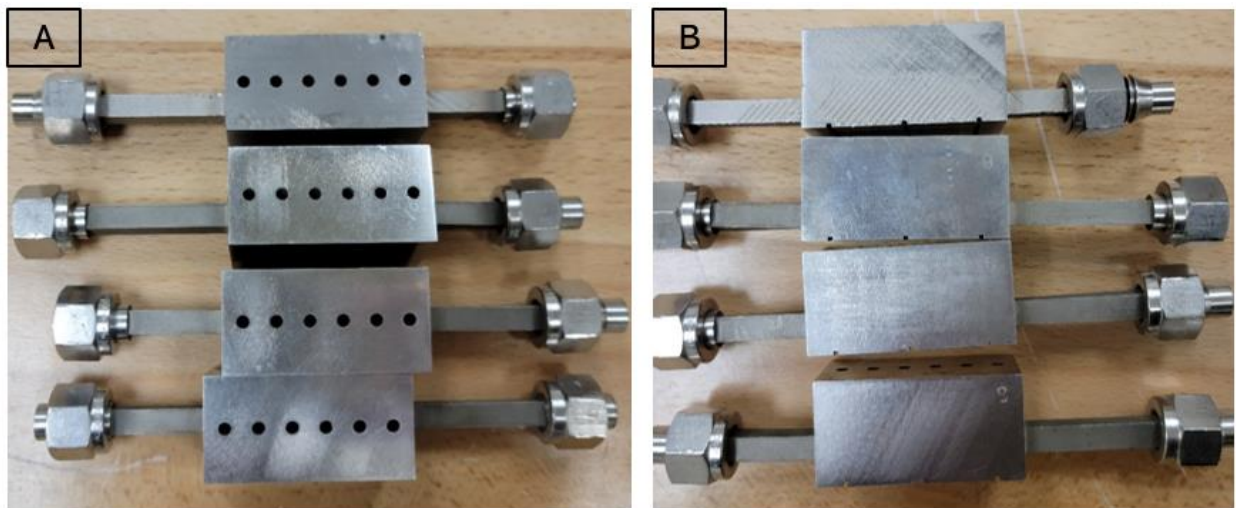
Samples made from Inconel 625. A) Top view, B) Side view with grooves on the bottom.
